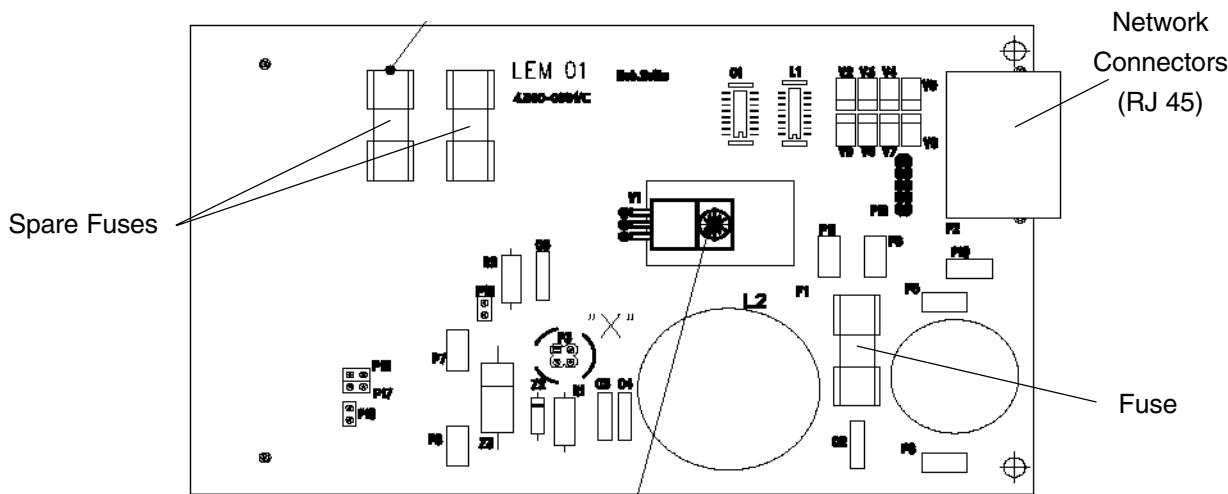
Fuses PCB LEM 01 (component side)
